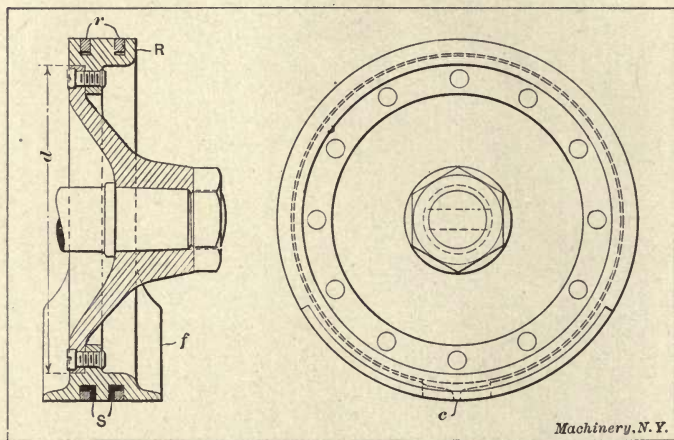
Cast-steel Single-plate Piston with Removable Rim
